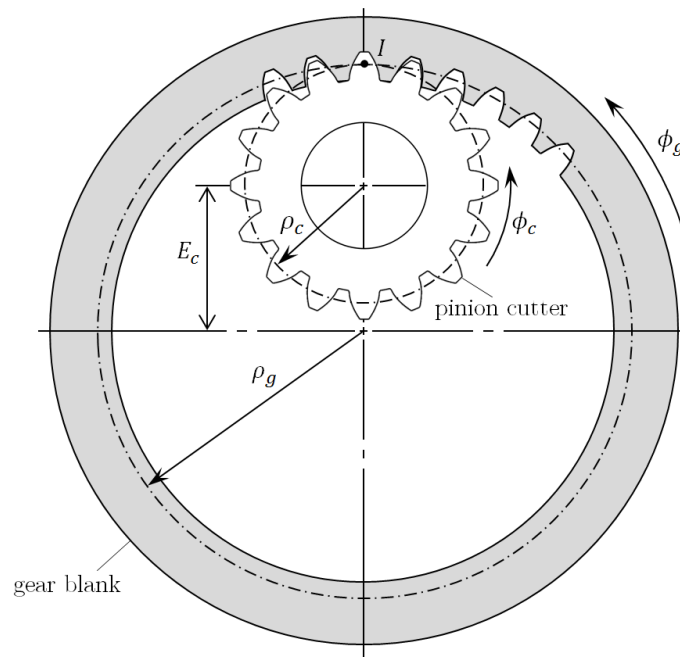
Manufacturing of an internal involute gear using a pinion cutter
